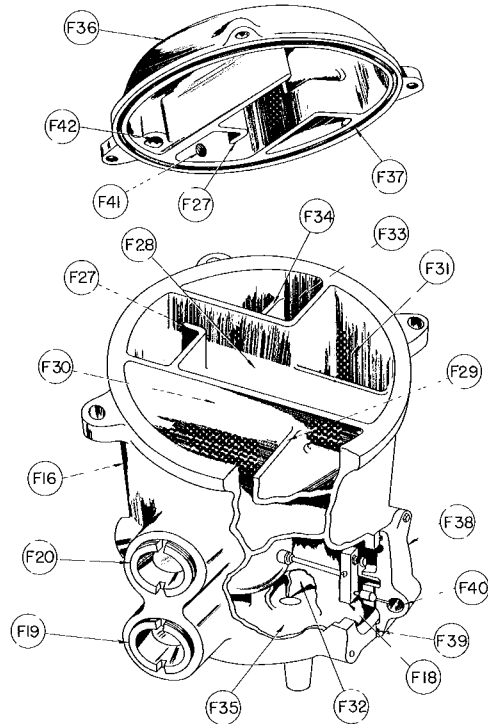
Purge Separation Chamber - Cut-Away View
